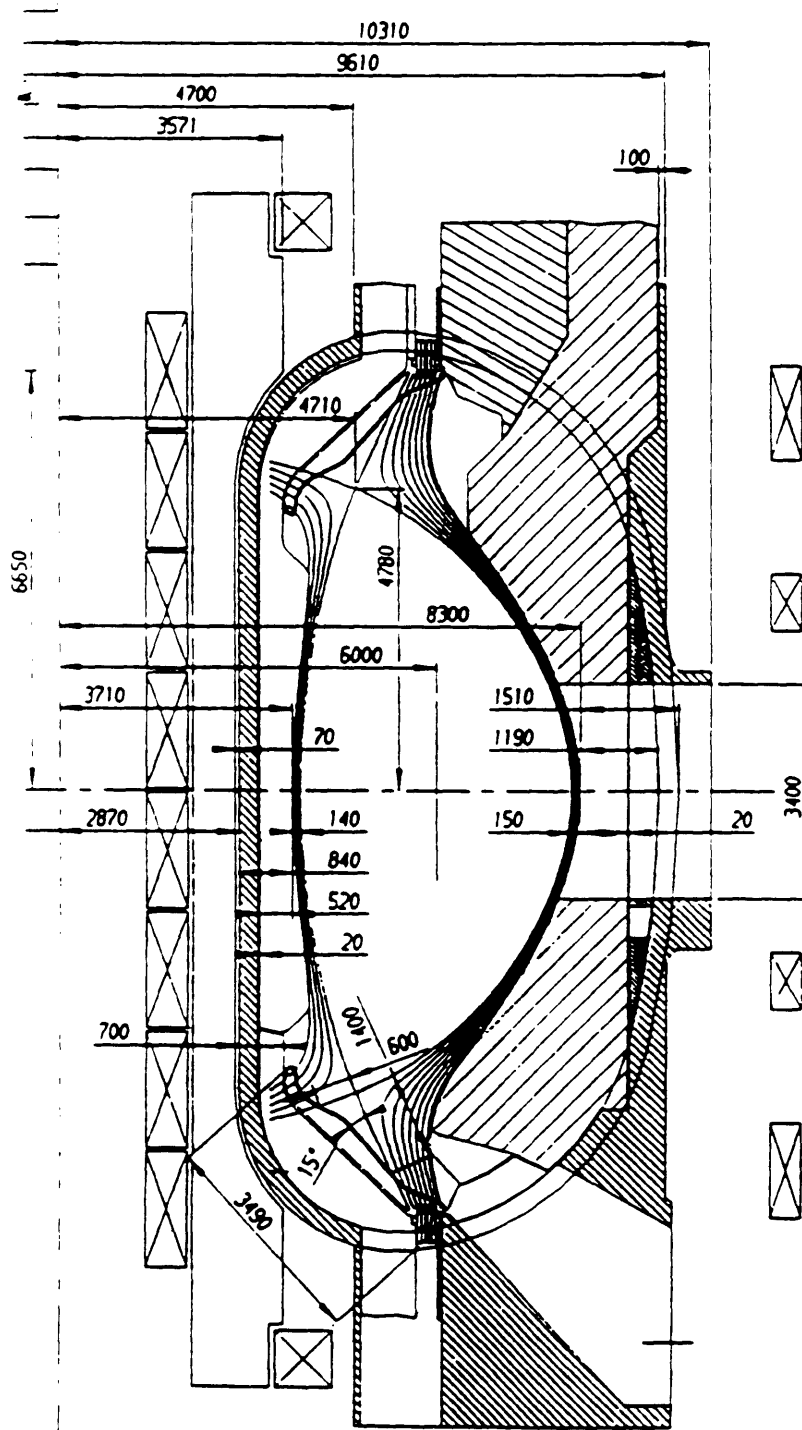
Layout of an ITER cross section, dimensions in millimeters [44]
